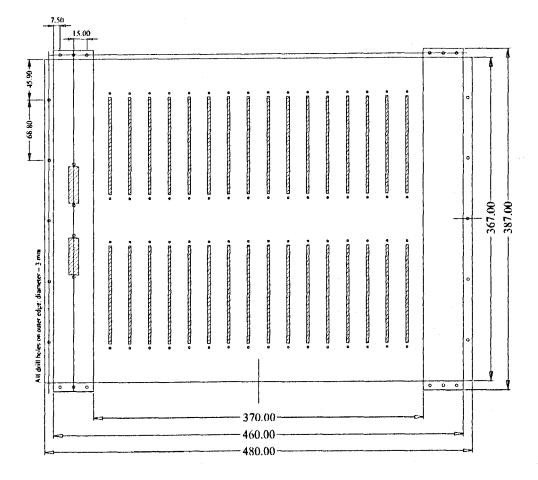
Design for the top half of the M2 Control Surface box. Dimensions in millimetres.
